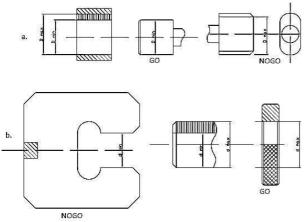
Gauges for smooth cylindrical pieces control a- for boring; b- for horseshoe
